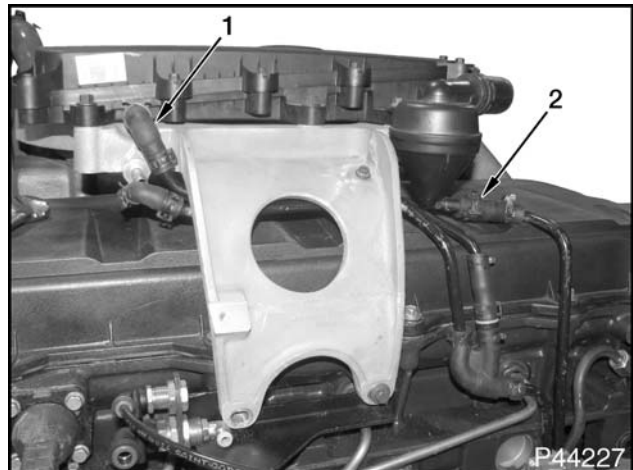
Upper tube assembly at upper fitting and middle tube assembly connections
